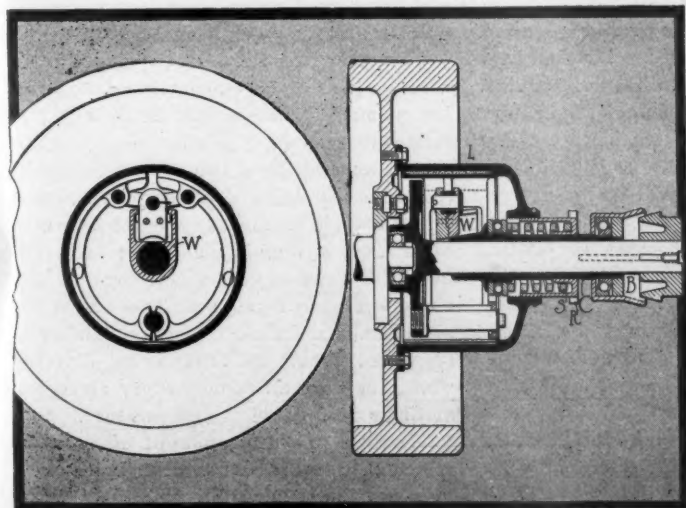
MECHANICAL DRAWING SHOWING DETAILS OF DERAIN CLUTCH
